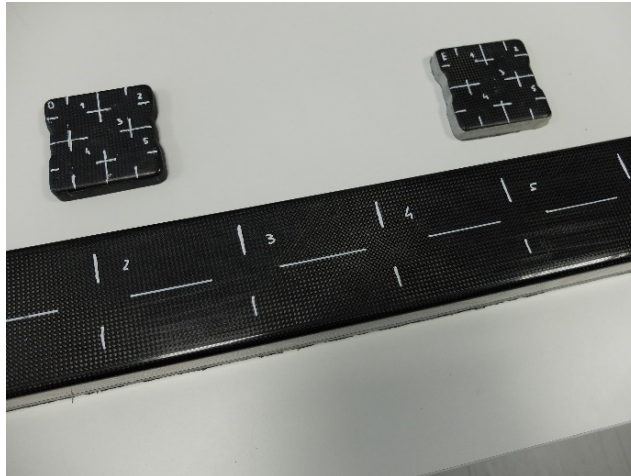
Places to measure thicknesses marked on parts submitted to ultrasound inspection
